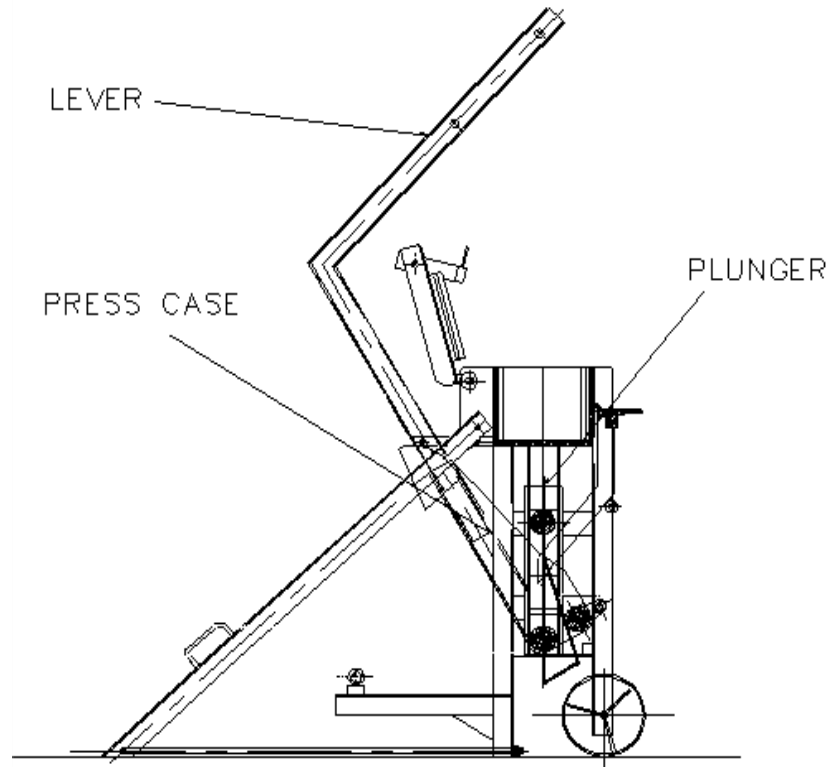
Schematic Drawing of IBM-M2 Machine
